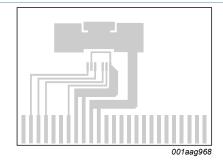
PCB used for thermal tests; heat sink area 400 mm²
